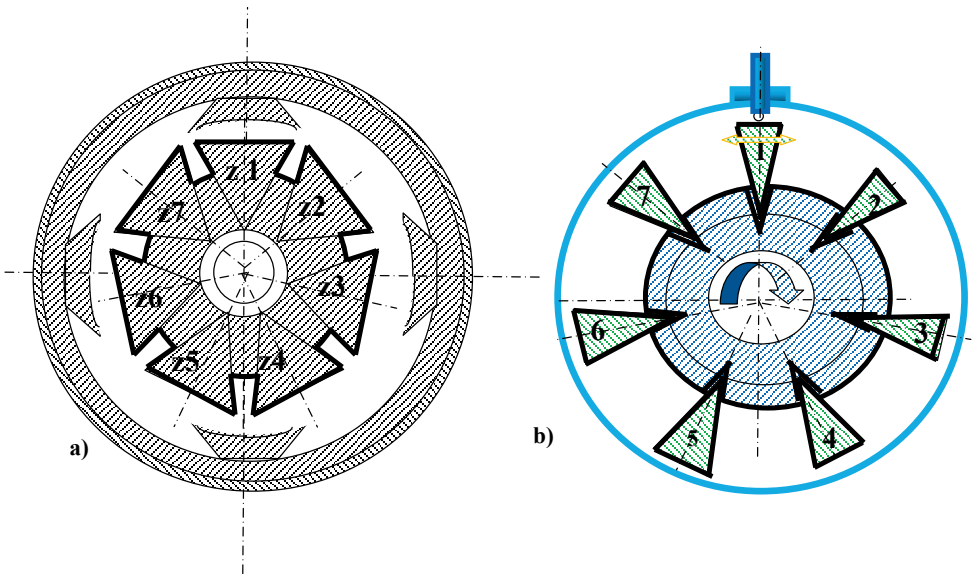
Compared geometry of electrical generator rotor teeth with a turbine engine compressor blade grid: a) silicon sheet of the generator rotor core package, b) blade grid of a turbine engine compressor
